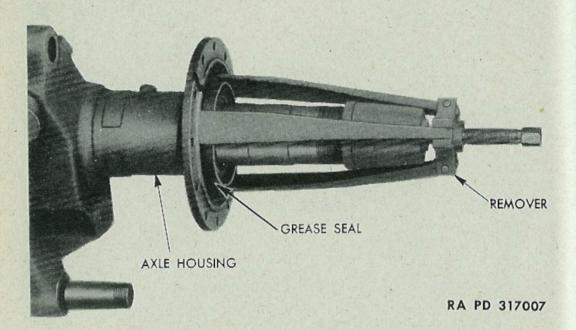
Removing Hub Inner Bearing Grease Seal from Axle Housing with Remover 41-R-2381-350
